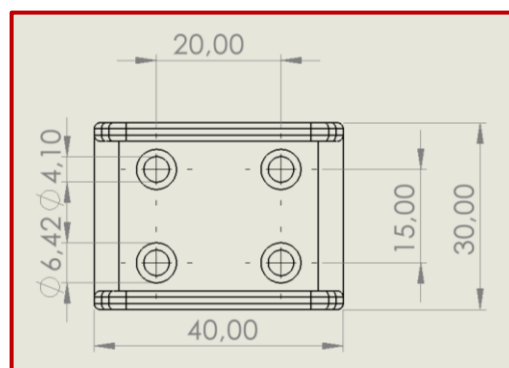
Dimensions of the External component to fix the Elastic Band.
